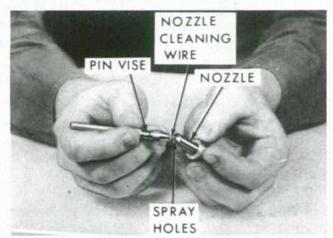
Use a cleaning wire held in a pin vise to clean nozzle spray holes.
